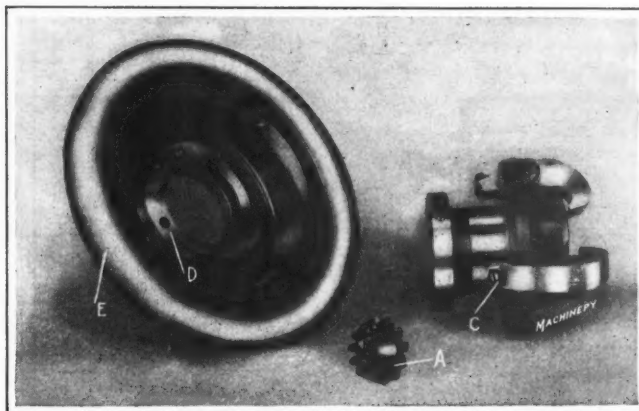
Bevel Pinion Chuck shown in Fig. 2, dismantled to show Construction
